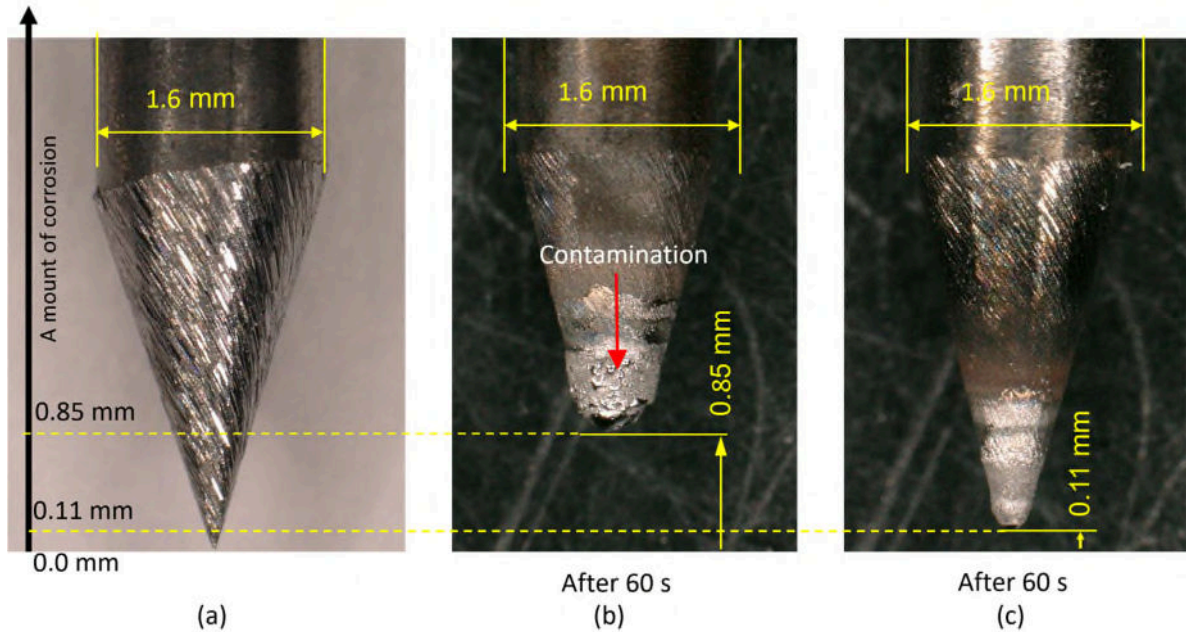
The tungsten electrode situation: (a) before welding, (b) after continuous welding 60 s with the conventional GTAW torch and (c) after continuous welding 60 s with the novel GTAW torch.
